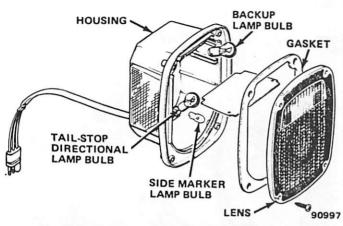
R-7 Rear Directional, Stop, Backup, Taillamps and Side Marker Lamps—CJ-Scrambler and Sport Truck Models
